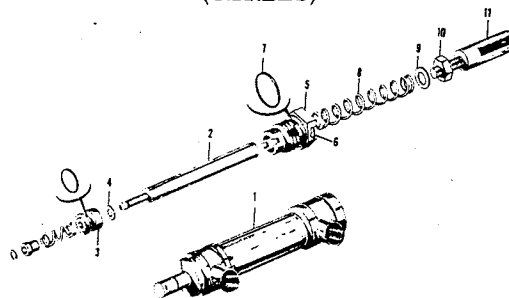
MASTER CYLINDERS AND PARKING BRAKE ASSEMBLIES
